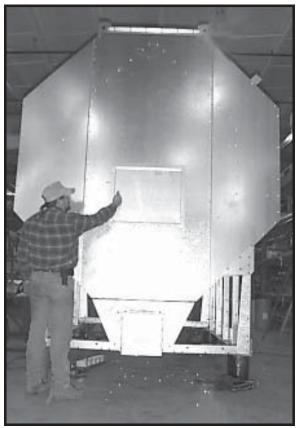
Checking fit of REAR DOOR ASSEMBLY.
